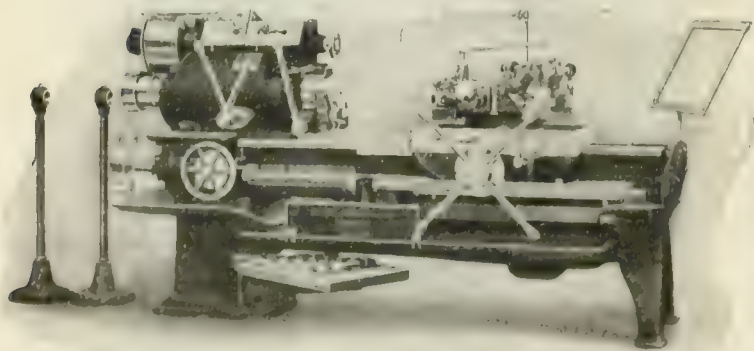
HERBERT & Co.'s STANDARD LATHE.
